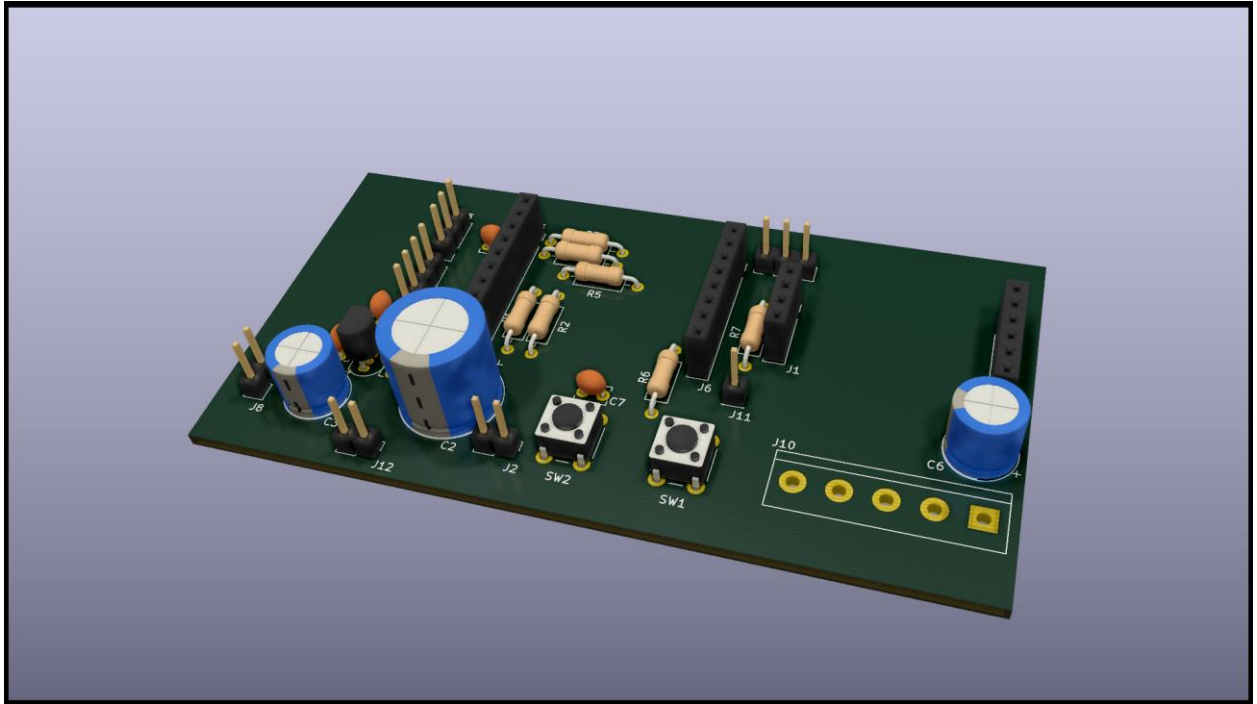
3D design of a PCB with through-hole components based on ESP8266 with an adapter board
